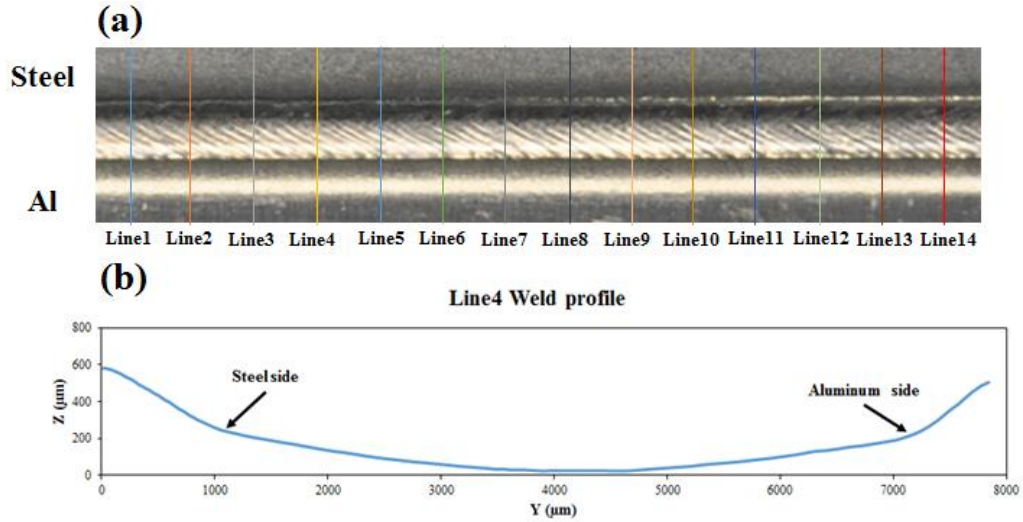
(a) Evenly spaced cross-sectional lines on the brazed seam to detect edge transition, (b) weld surface cross-sectional profile.
